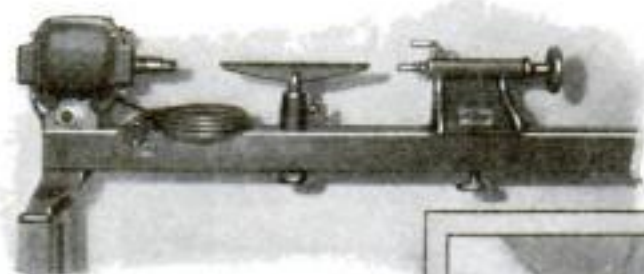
This is a lathe which is driven by a motor mounted directly on the headstock. The choice of lathe is largely a matter of personal preference.
